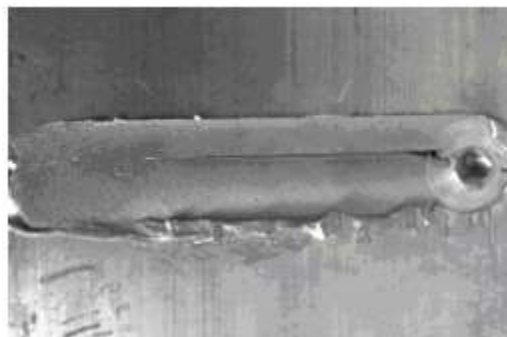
Typical FS welded plate having tunneling defect in welded area
